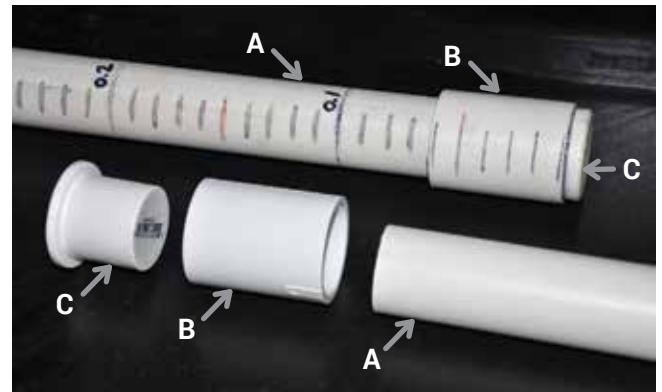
End pieces of the 2-m rod. 1" PVC pipe (part A) is inserted into a slip fitting (part B). An end cap or plug (part C) is inserted into the other end of the slip fitting (part B). In the background is the assembled product.
